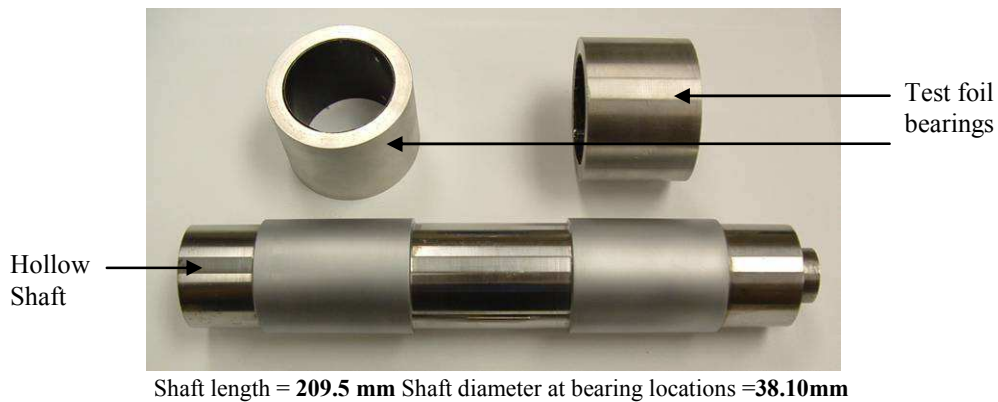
Test rotor and test foil bearings for rotordynamic tests
